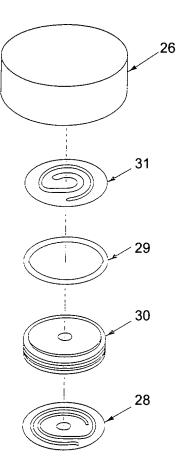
1<sup>st</sup> Stage Valve Assembly.
